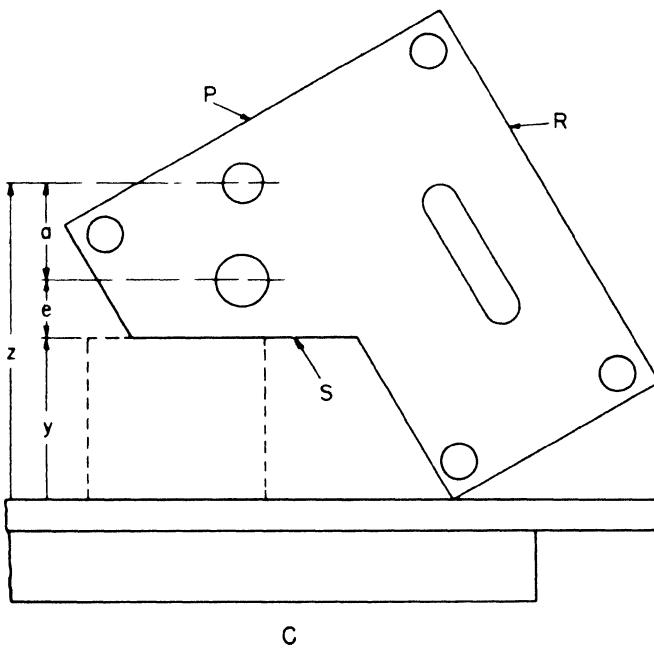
(C) Work-piece positioned so that the remaining dimensions may be measured and calculated.
